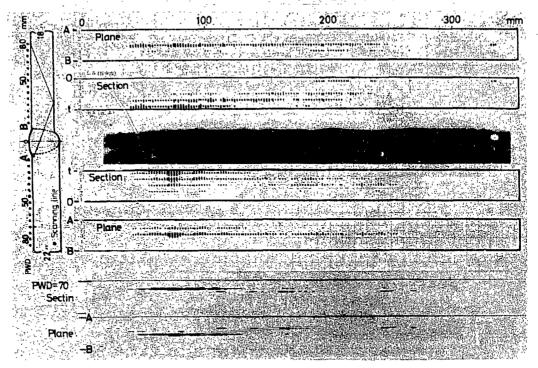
Example of quasi 3-dimentional display chart with point plotting X-Y recorder and electrical discharge pen (120 pens) recorder. (End crack of one-side welded plates)
